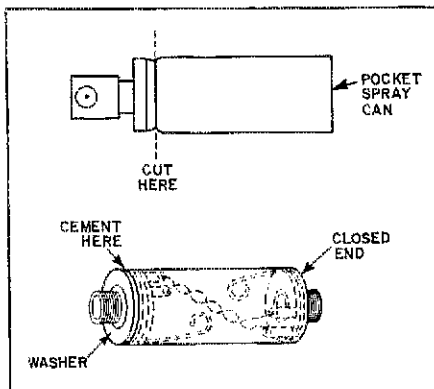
This drawing shows an x-ray view of a completed tweeie containing two phone jacks mounted in a used pocket-size spray can.
